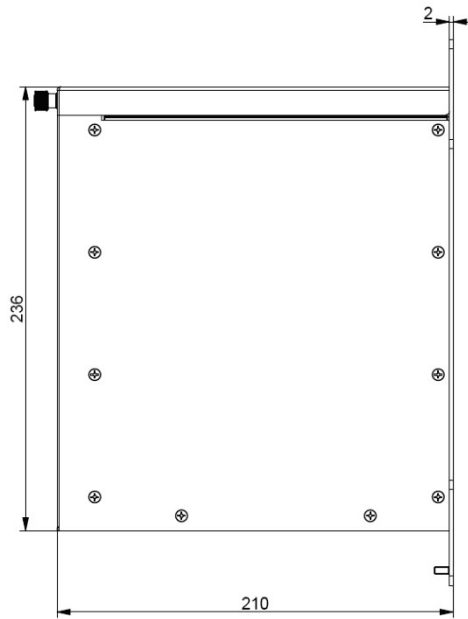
Dimensions: front side with key holes (KBox C-104-TGL-4)
